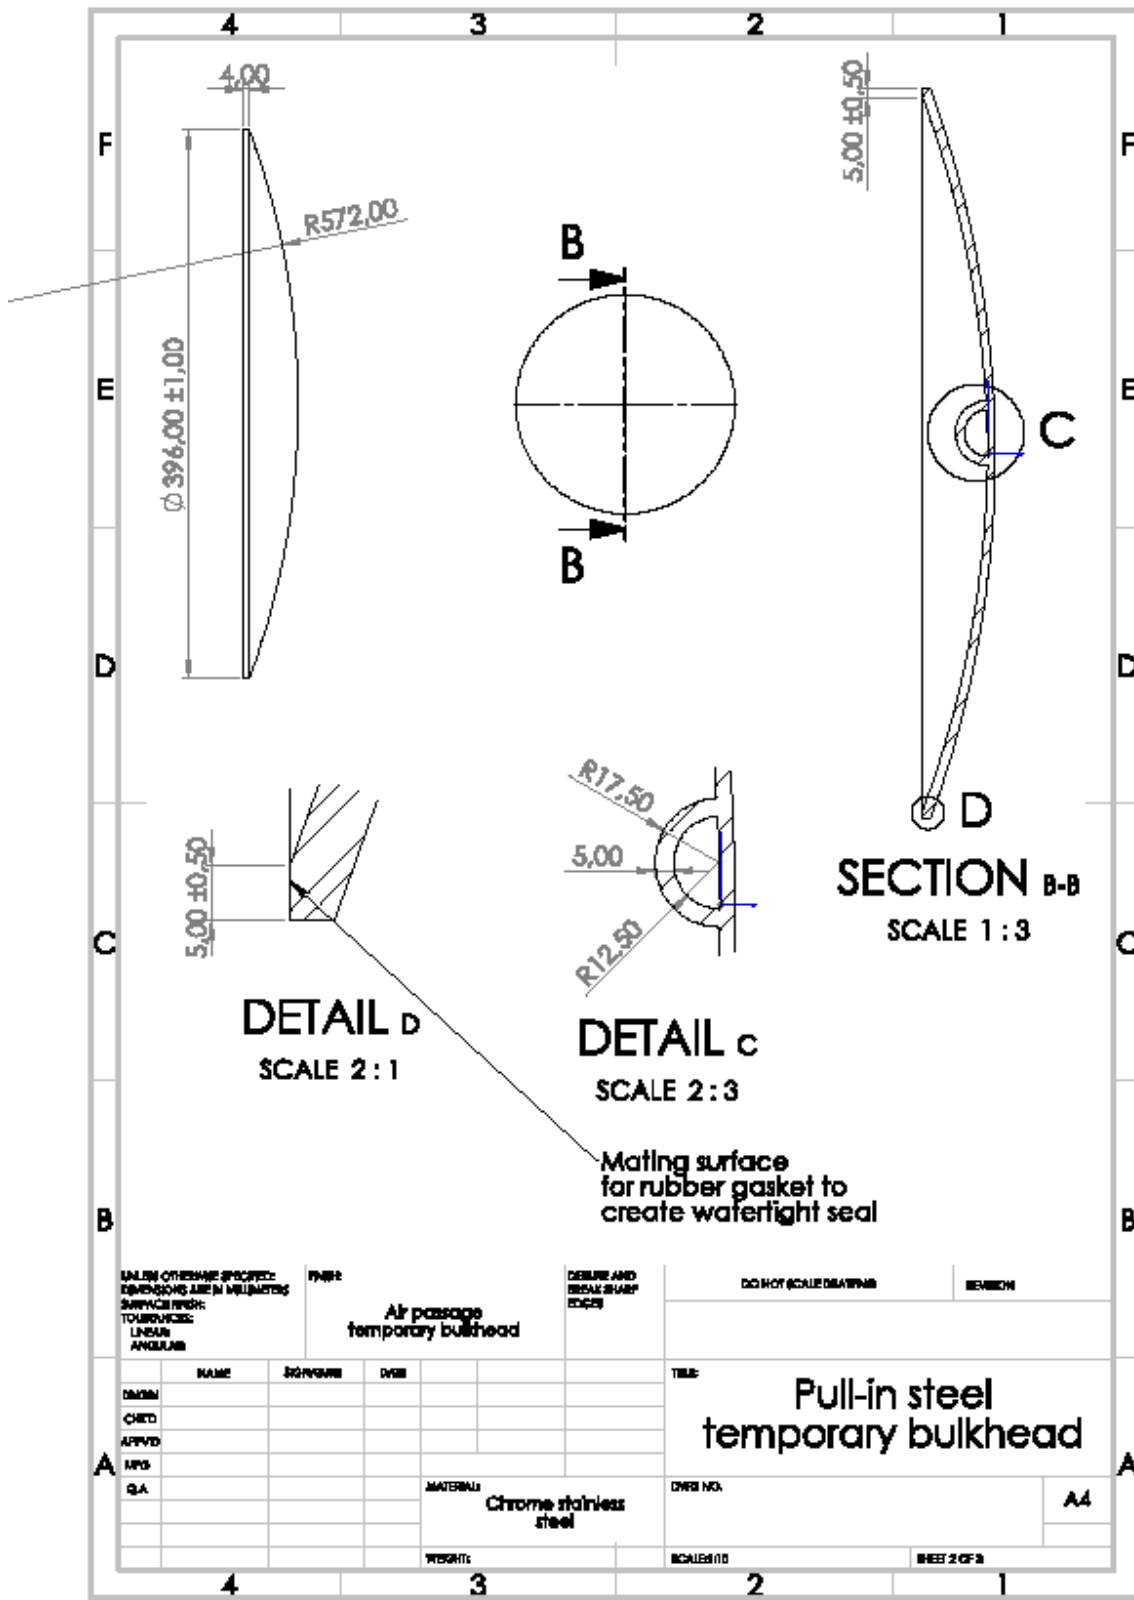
2D technical drawing of the air passage pull-in steel temporary bulkhead
